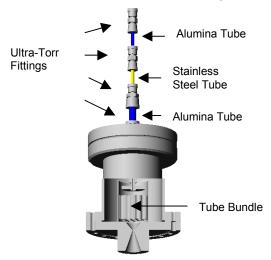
Cutaway view of BLPT showing redesigned anode/gas inlet system.
